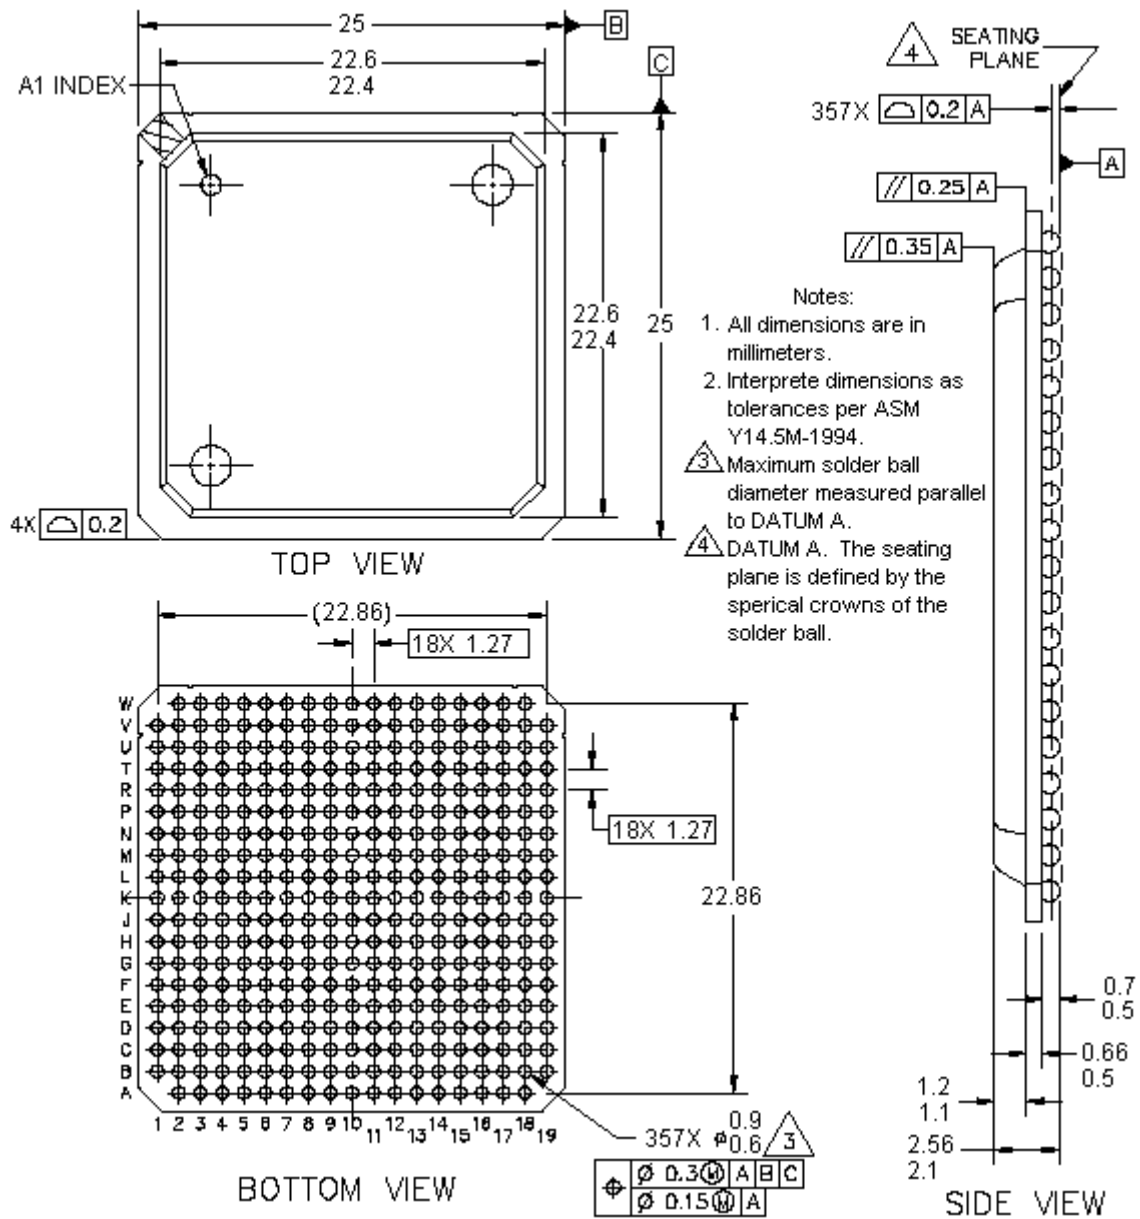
MPC8241 Package Dimensions and Pinout Assignments (ZQ and VR Packages)
